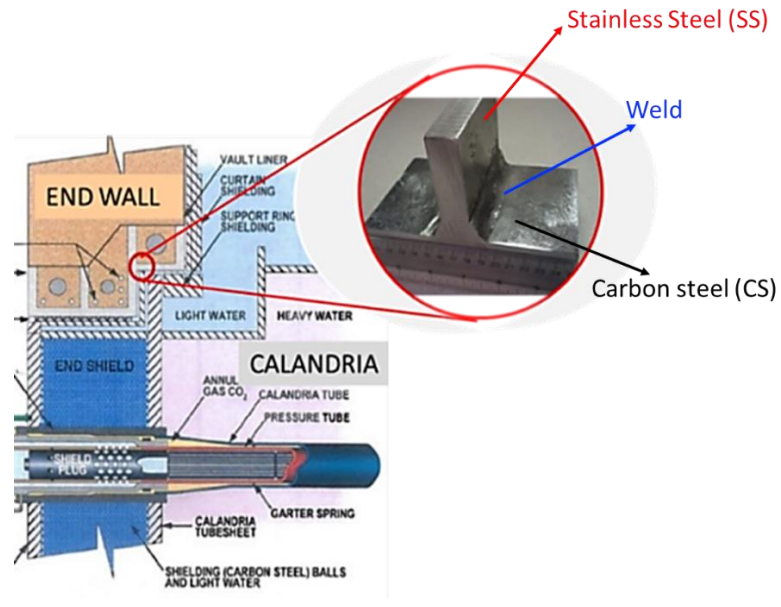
Schematic of the calandria tank assembly and its supporting structures in a CANDU reactor. The red circle indicates the location of the carbon steel (CS) and stainless steel (SS) weld joint (b) a SS-CS weld block supplied by Ontario Power Generation (OPG).
